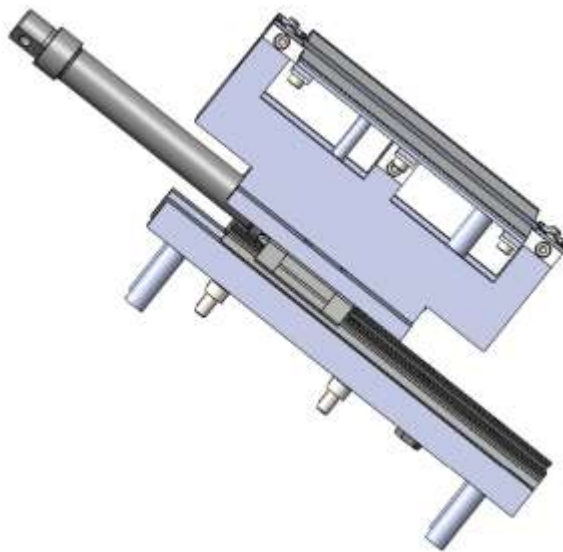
Actual tilted view of tape pressing cylinder and label container
